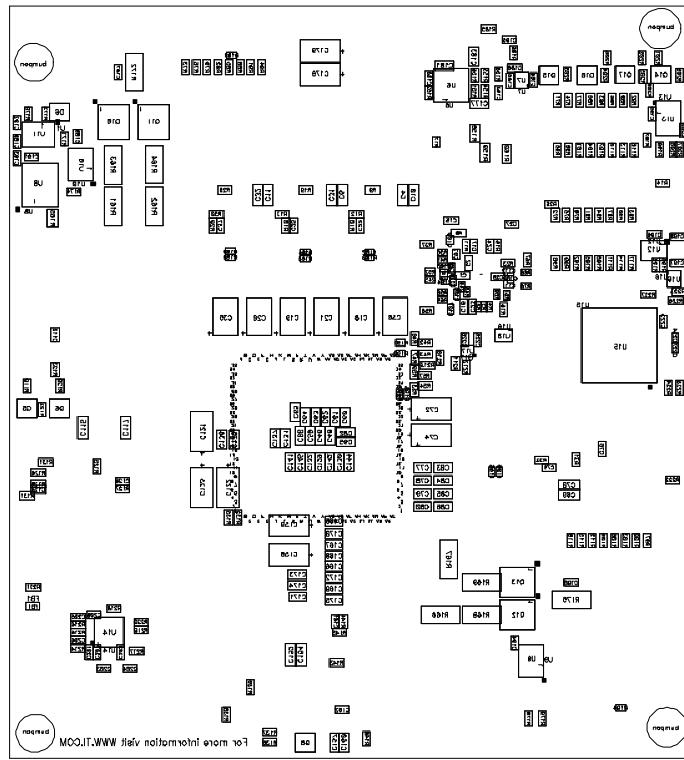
TPS59640EVM-751 Bottom Assembly Drawing (Bottom View)
